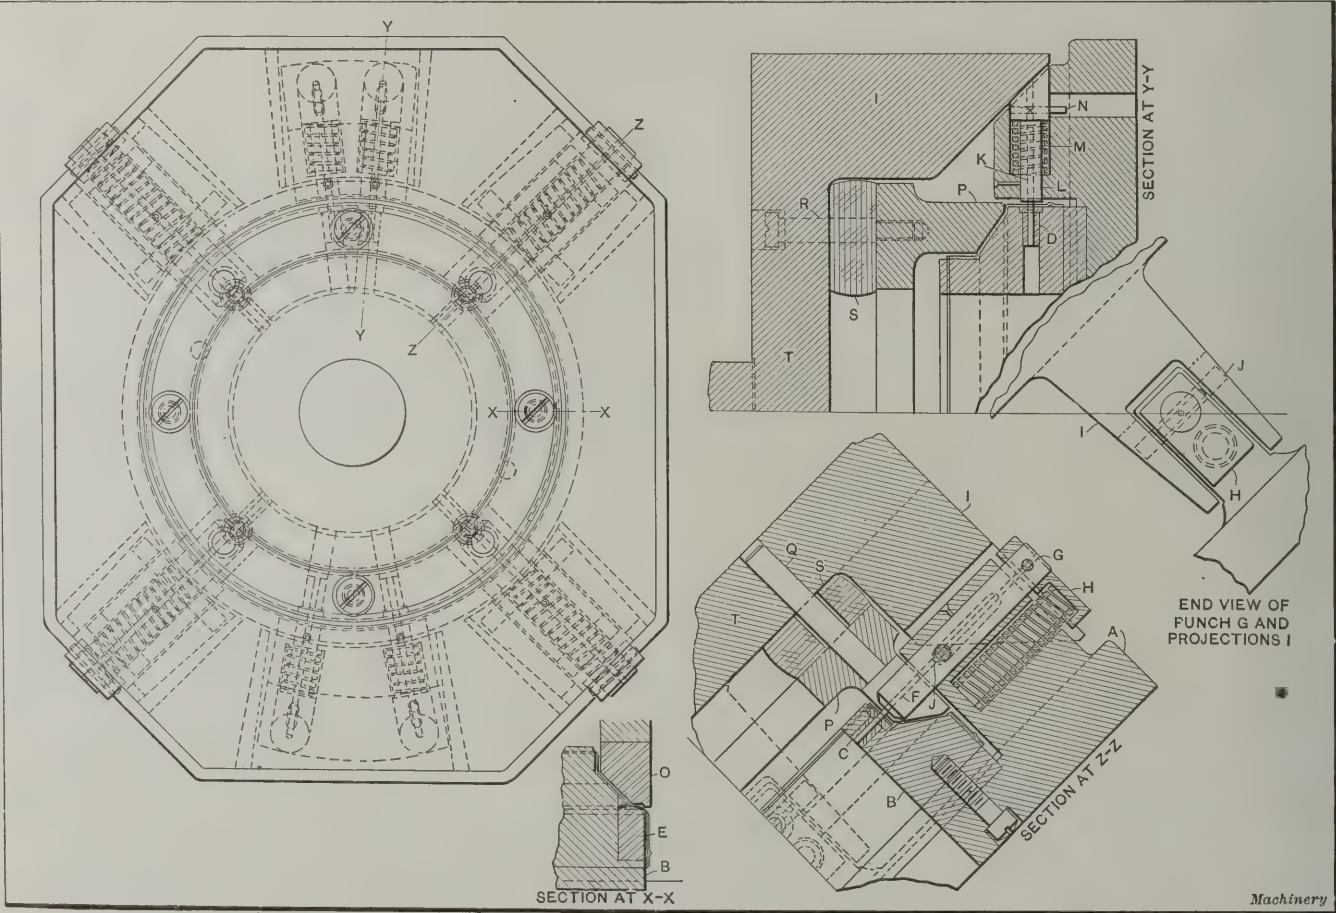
Piercing and Embossing Die for Automobile Head Lamp Front
